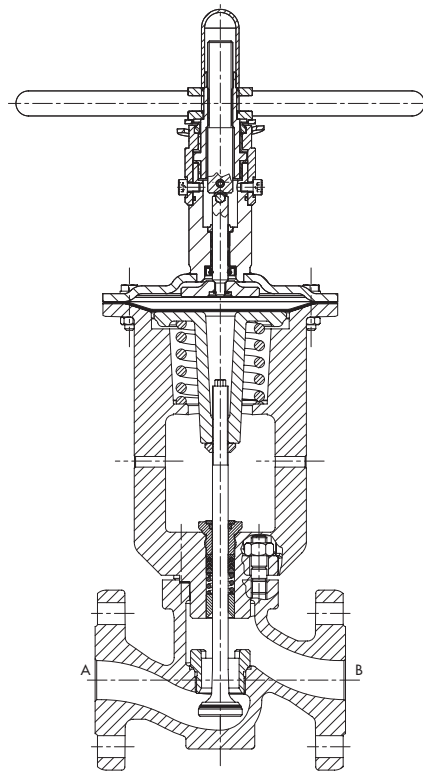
Type 3351 Pneumatic On/off Valve with handwheel
